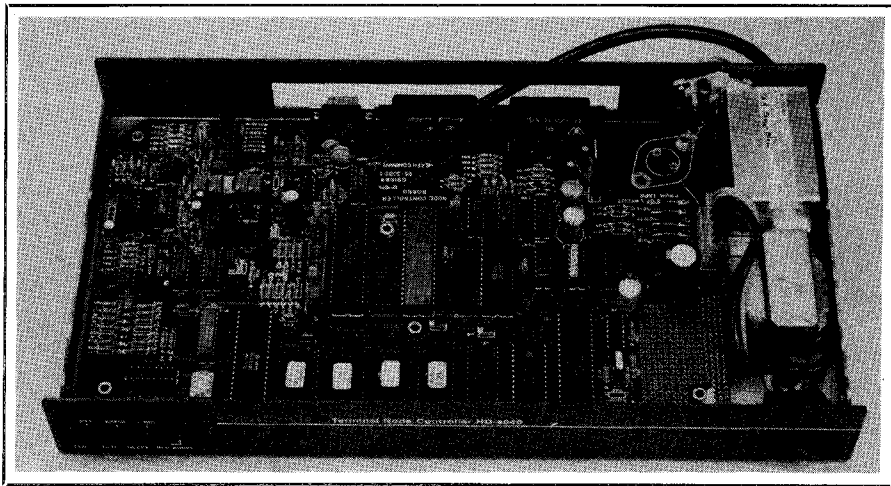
The Heathkit HD-4040 is supplied in kit form, with cabinet and power supply, and can be assembled in about 10 hours. The power-supply regulator mounts to the rear cabinet panel, eliminating the heat sink.
